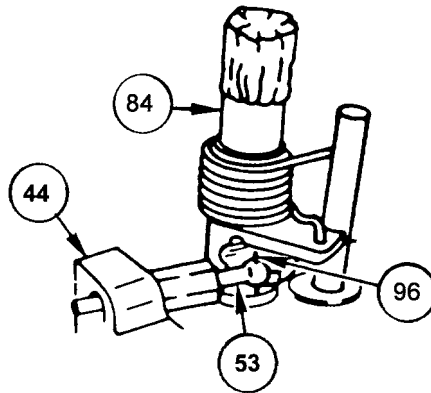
Right Brake Apply Cam, Link, and Brake Apply Shaft.
